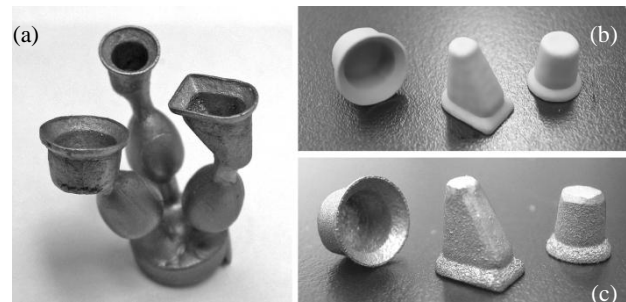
Caps manufactured by investment casting of CoCr alloy (a), milling of Zirconia (b), and Selective Laser Sintering (SLS) of CoCr alloy (c)
